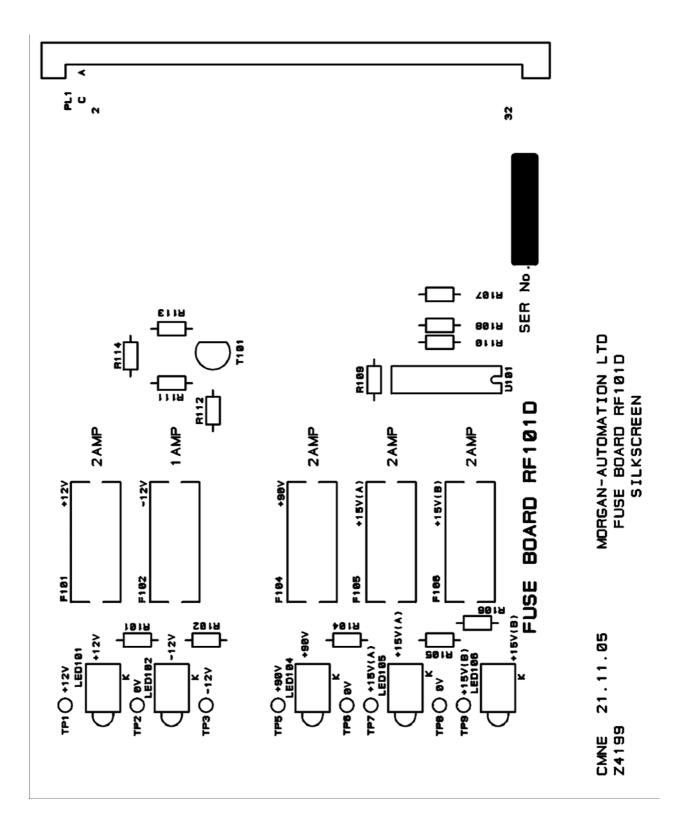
Fuse Board – RF 101 D – Component Layout
